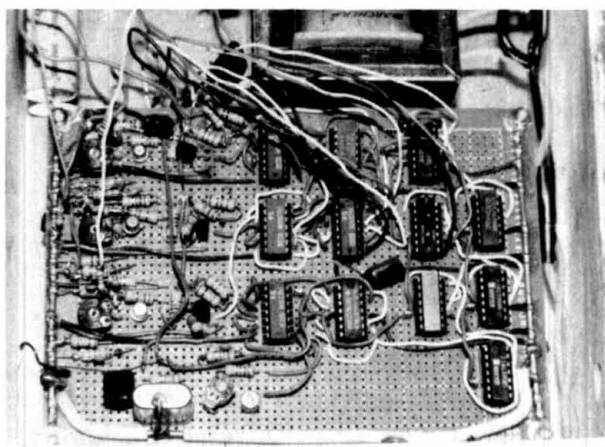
Photo F. Clock oscillator has prominent location in lower left corner of top board view.
